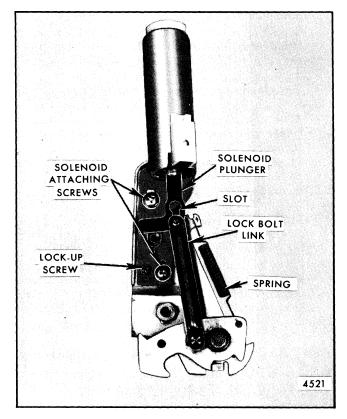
Front Seat Back Electric Lock Solenoid and Support Assembly - All Two-Door Styles with Standard Full Width or 60/40 Seats
